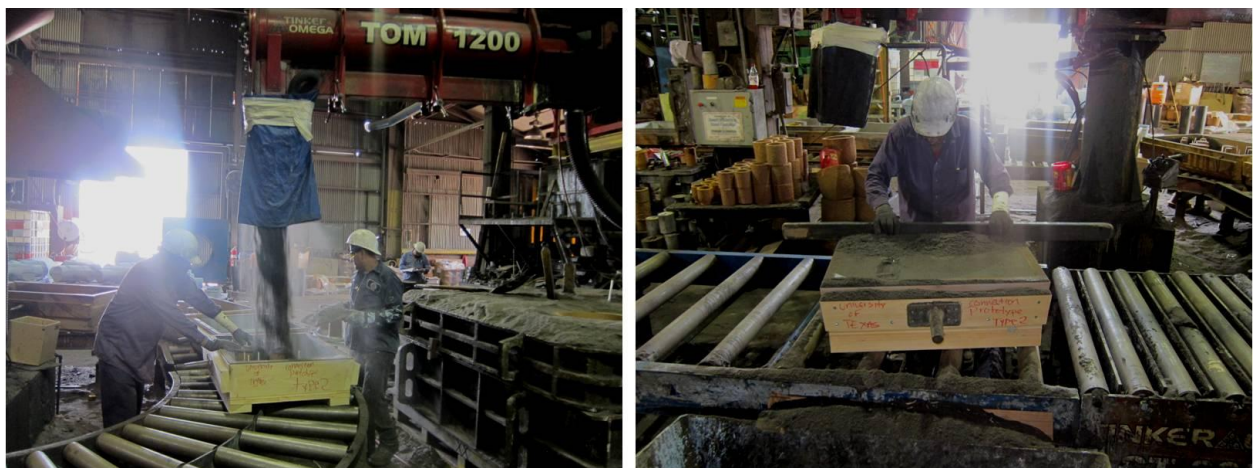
(a) Pouring Sand Slurry into Pattern Box and (b) Compacting Sand Mold
